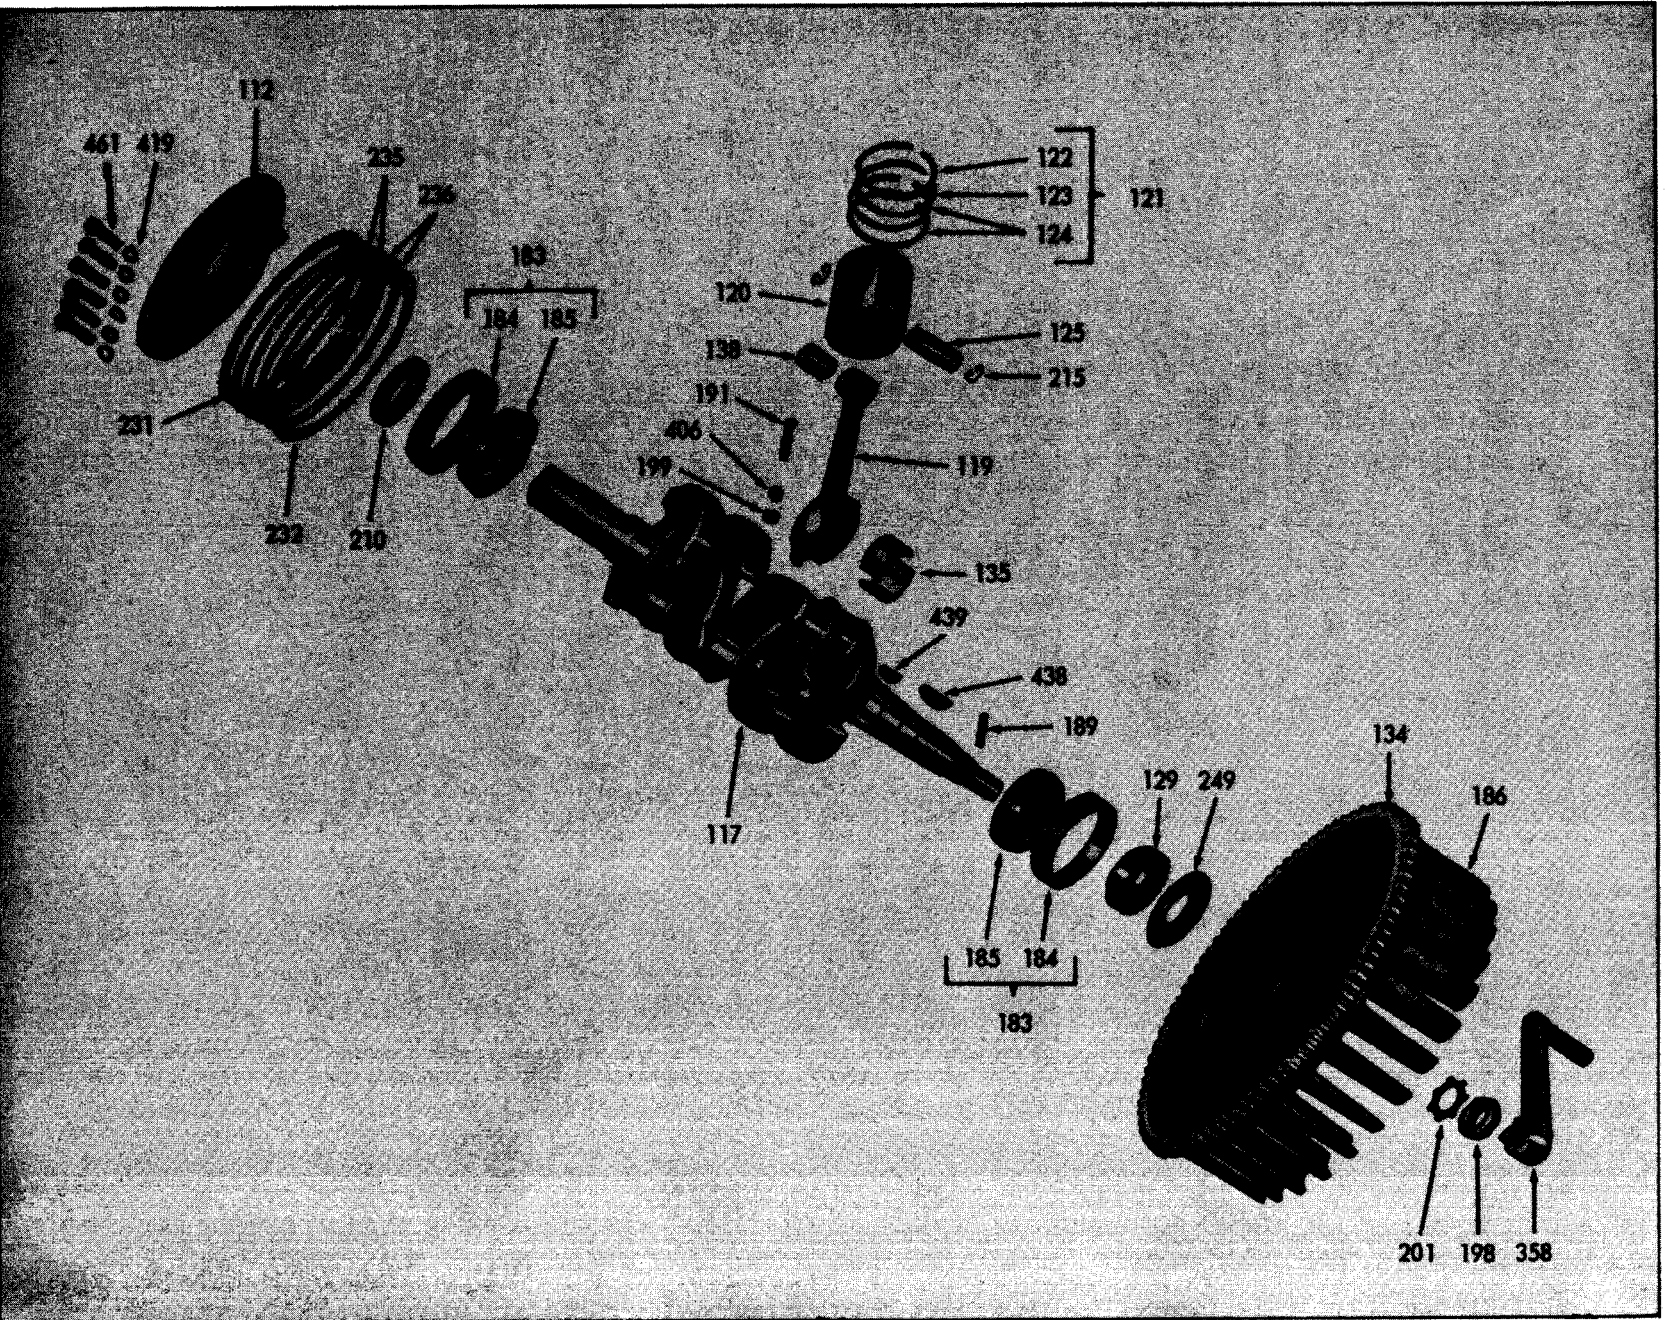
, CRANKSHAFT, PISTON AND CONNECTING ROD GROUP
